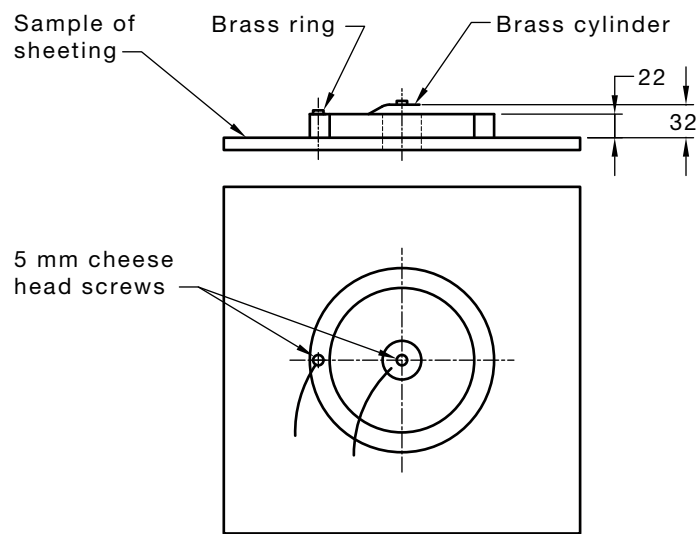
TEST LAYOUT SHOWING WORKING DIMENSIONS OF BRASS CONTACT PIECES
